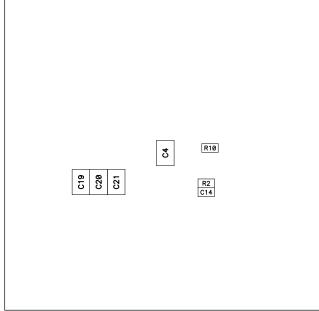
TPS56221EVM Bottom Assembly Drawing (Bottom view)
